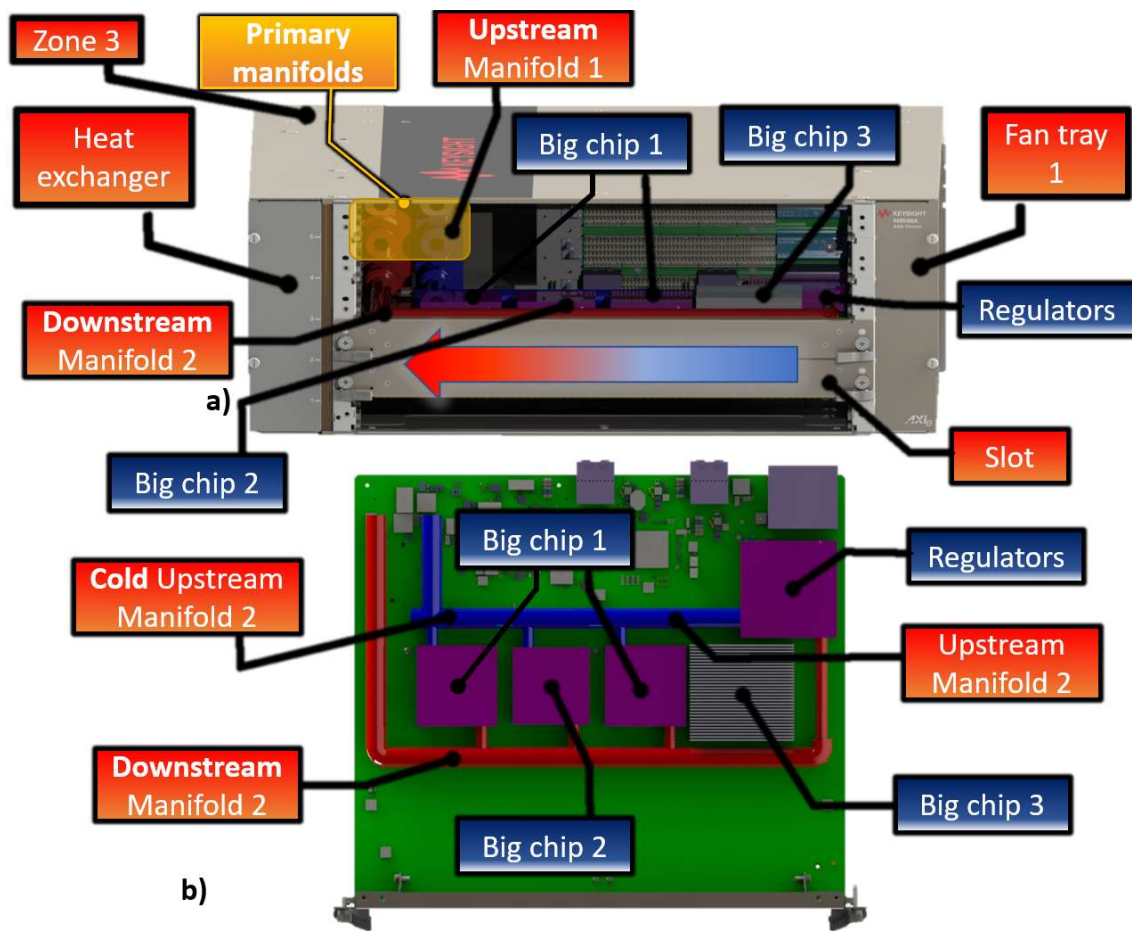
Rendered liquid cooled AXIe chassis a) Front view system b) Top view board
